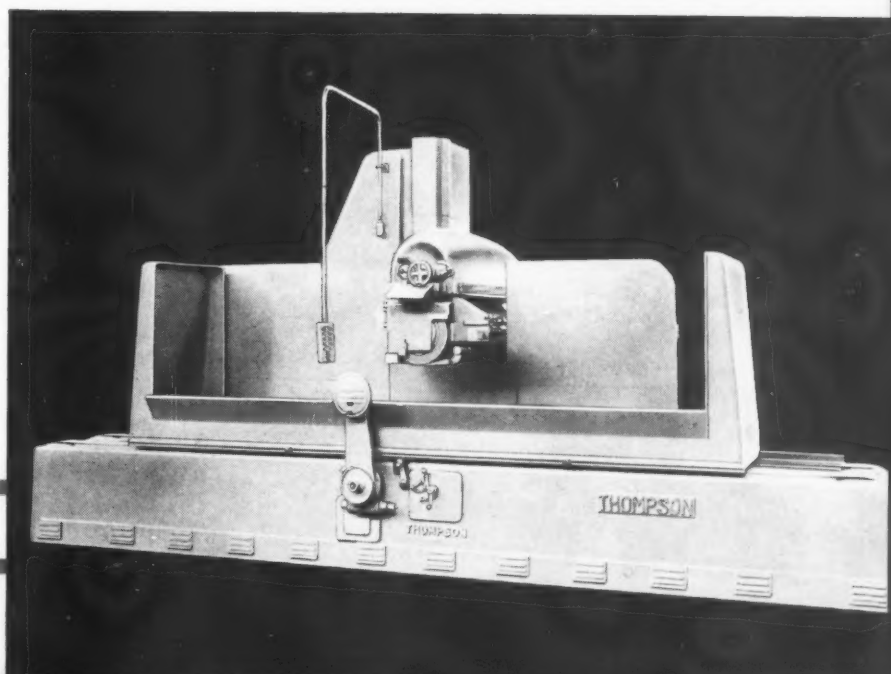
(Above) Truforming Grinder with Thread-roll Die-grinding Fixture, Made by Thompson Grinder Co.
